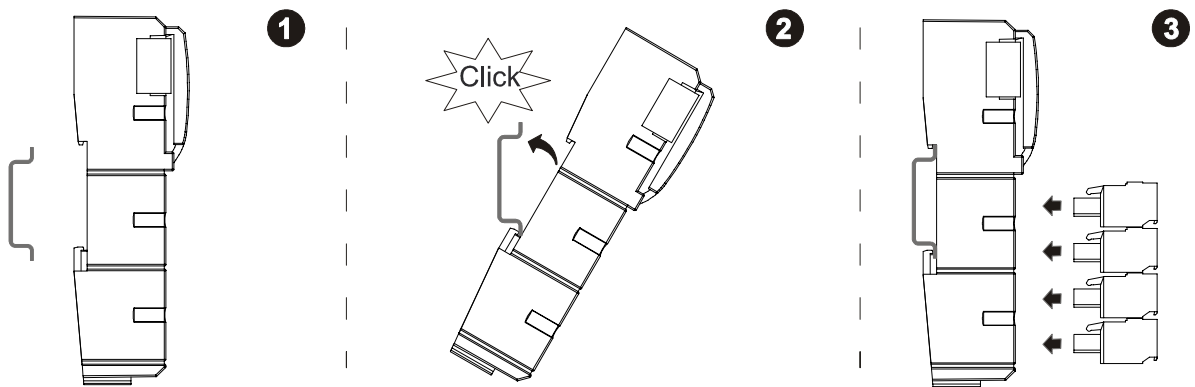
Mounting IMPACT20 modules on DIN mounting rails
